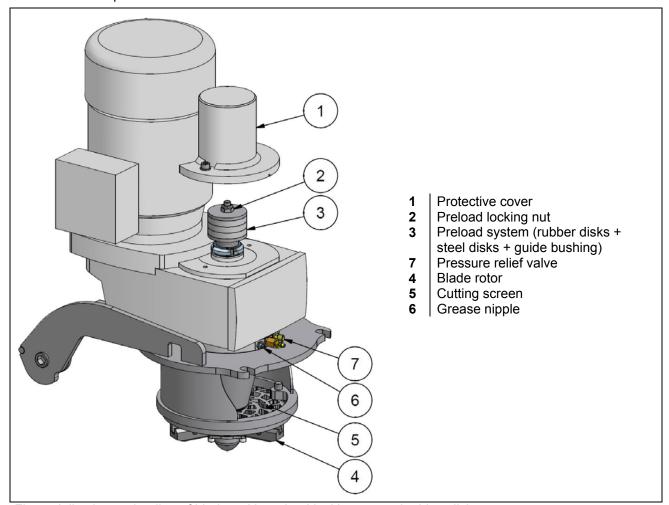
Adjusting preloading of blades with preload locking nut and rubber disks
